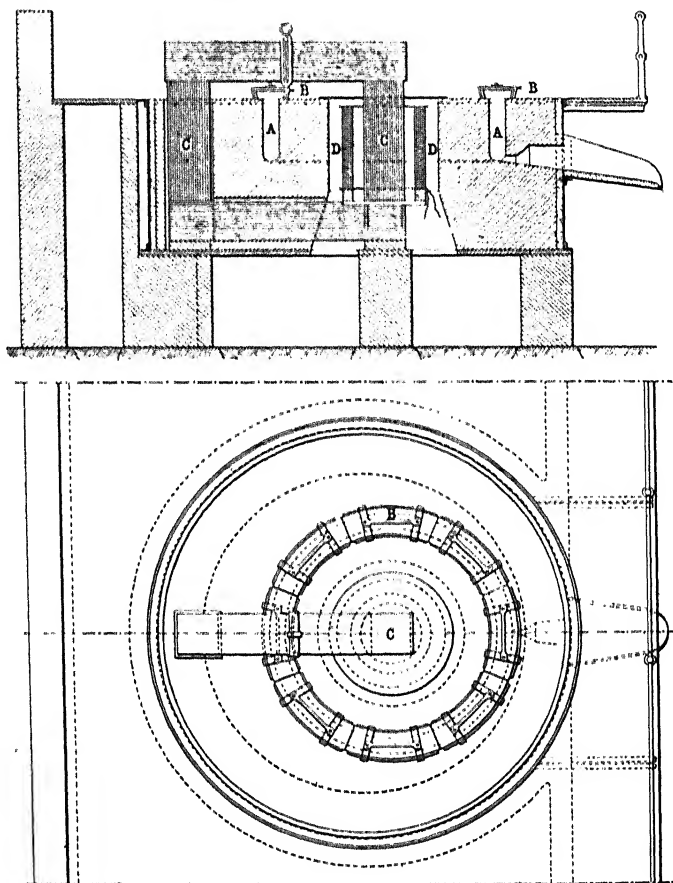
SECTIONAL ELEVATION AND PLAN OF KJELLIN FURNACE.
